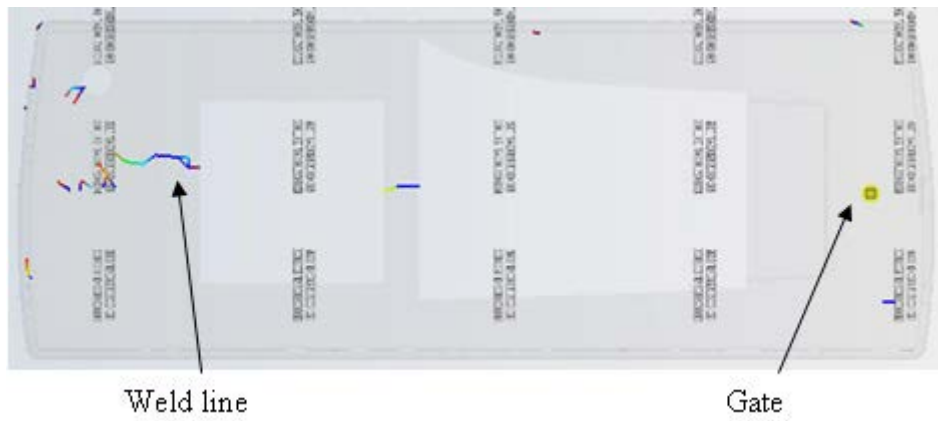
Weld lines produced by one injection gate a location C
